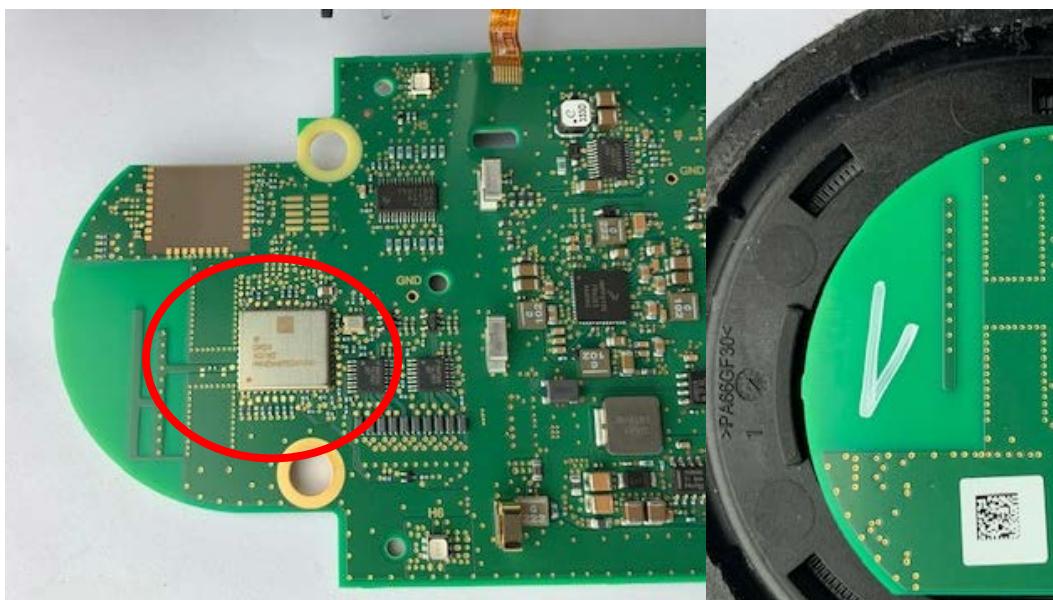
Display PCB with Murata module (front-, and backside) this is the used WLAN/WiFi module
